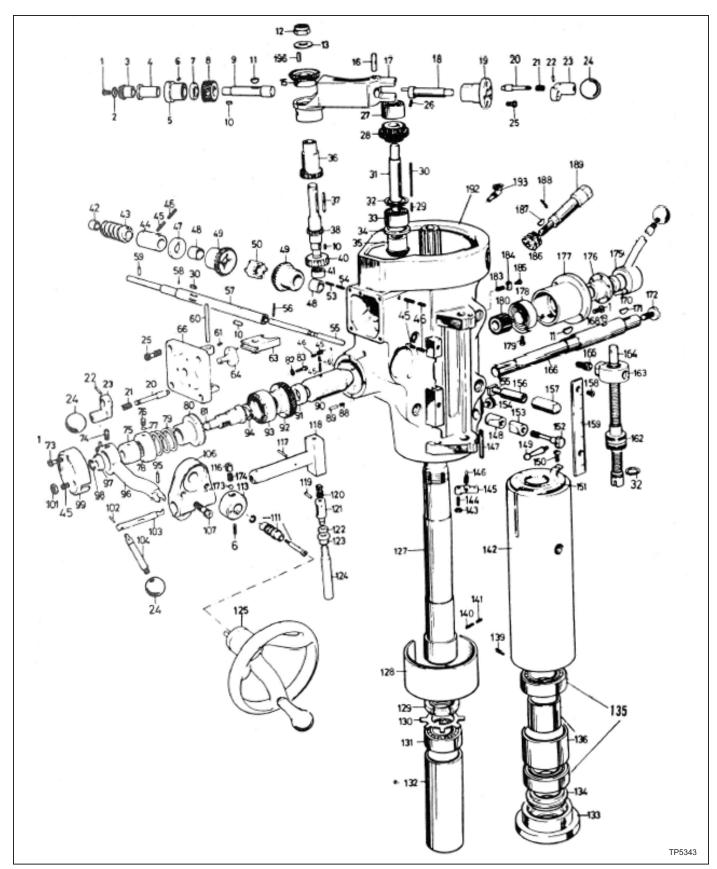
2J- and J-Head Lower Housing Assembly
